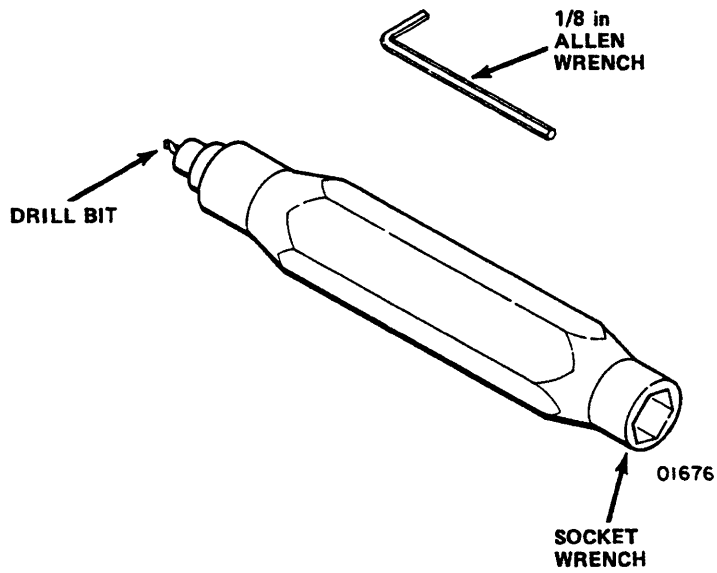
IEEE 802.3 Cable-Tap Tool Kit
